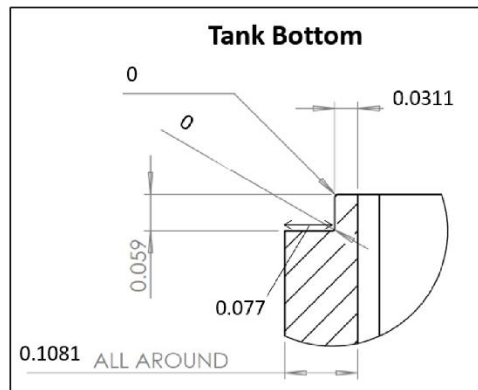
Worst Case Weld Geometry – Tank Bottom
